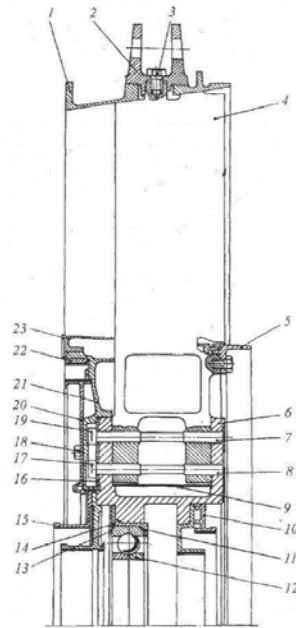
Rear support housing of the D050 power turbine [15]:
